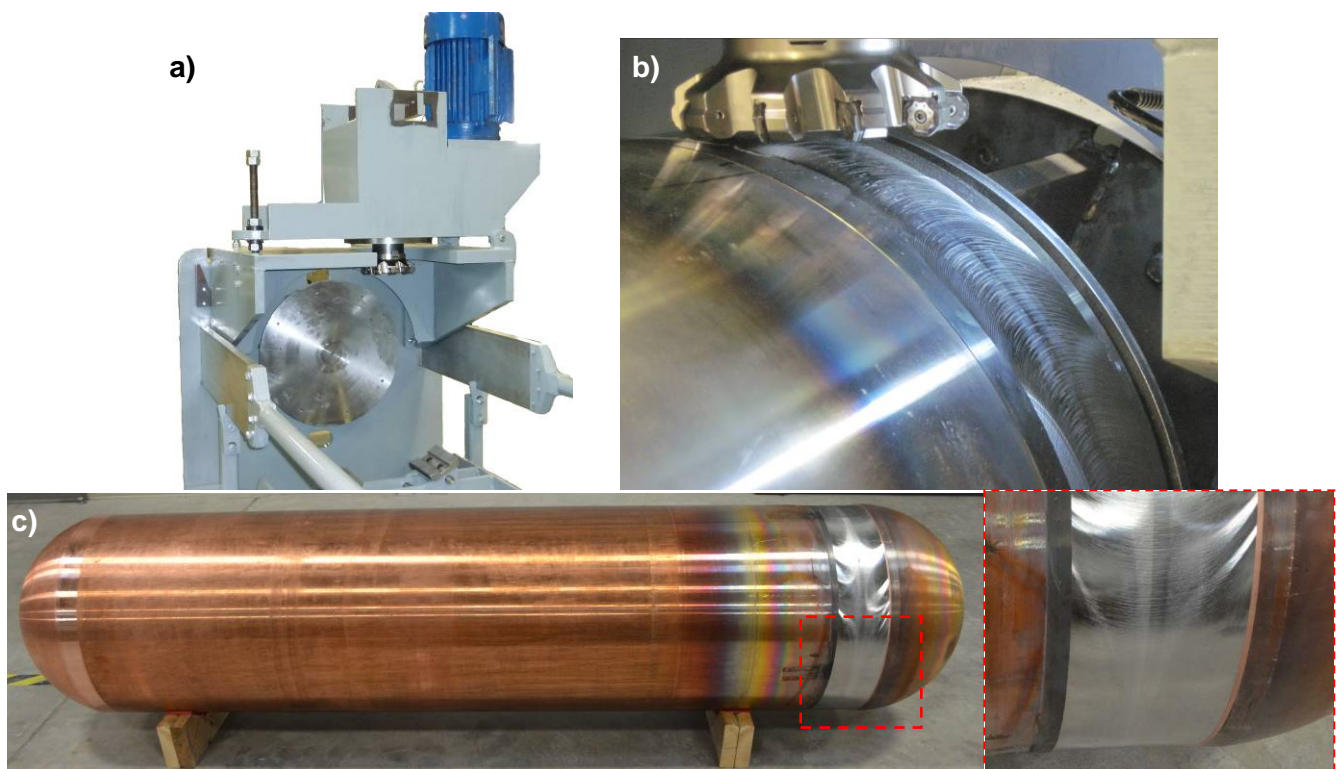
Mark II Used Fuel Container Machining (a) ROTEQ with weld cap removal attachment installed (head chuck removed for clarity) (b) Close-up of face mill cutting tool (c) Post-machining surface finish
